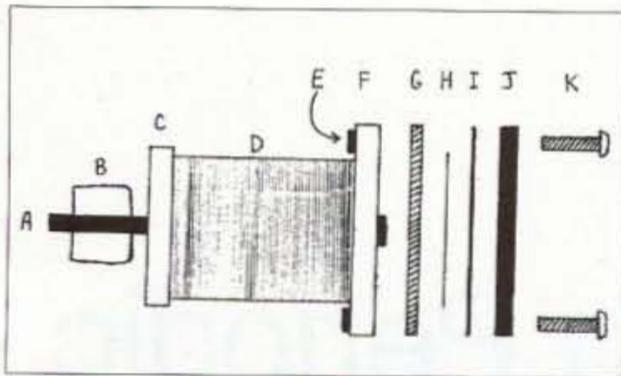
Magnetic headphone assembly (see Parts list for key).
